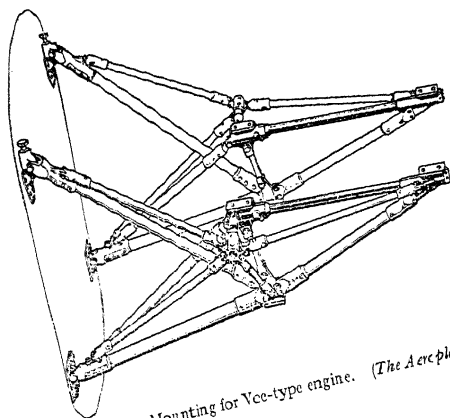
Mounting for Vee-type engine. (*The Aeroplane*.)
